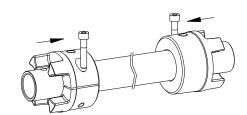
Assembly of ZR clamping hubs on the ZR intermediate pipe
